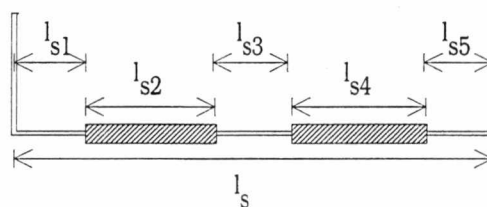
Dimensional Detail of Horizontal Cross Sectional Area of Capillary Sensor.
